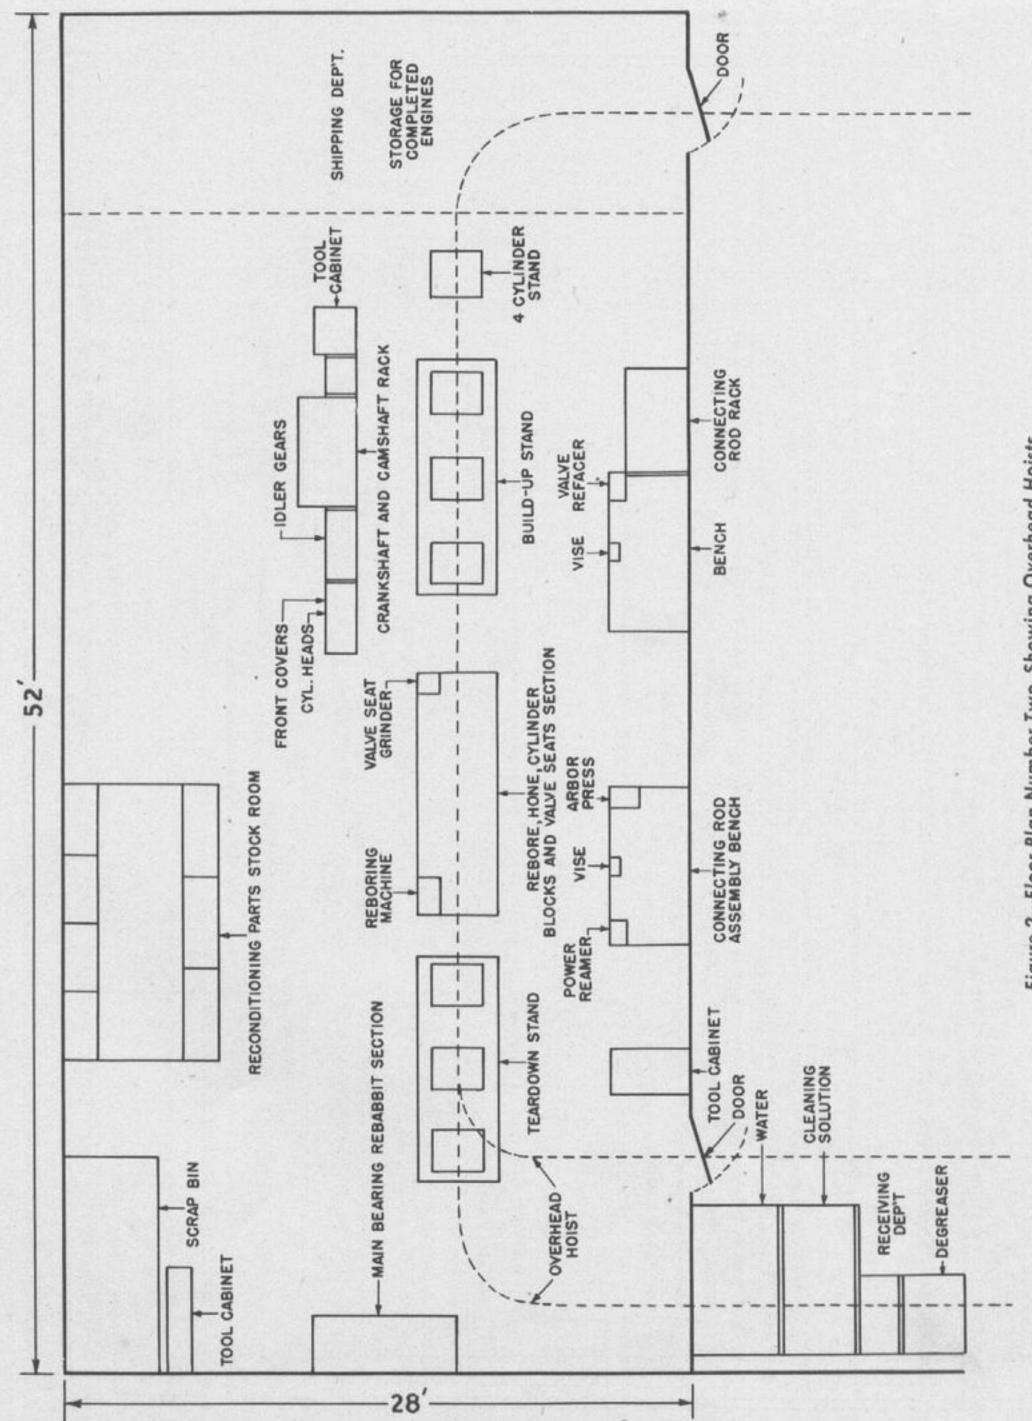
Floor Plan Number Two, Showing Overhead Hoists
